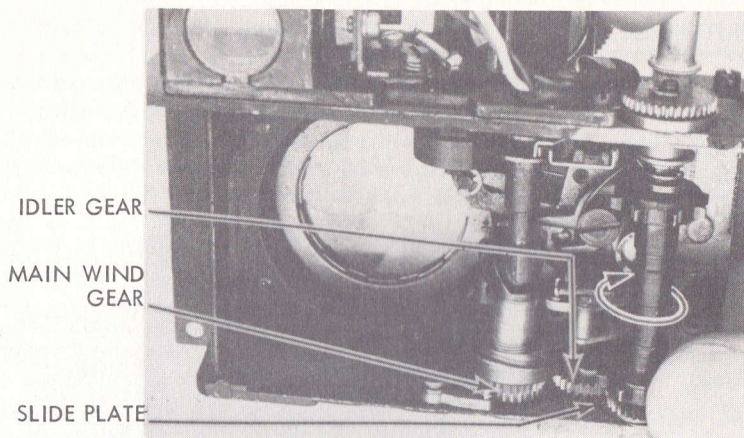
BACK OF FRONT PLATE/SHUTTER ASSEMBLY
